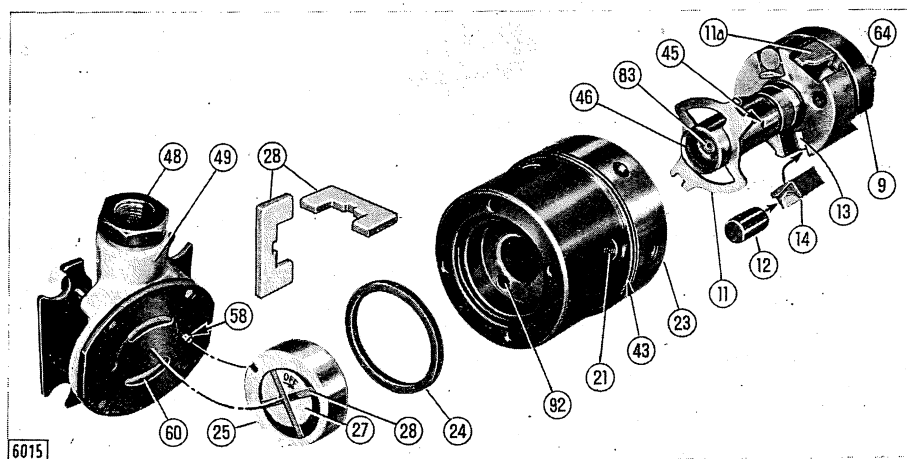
Vane-type pump, hydraulic head (23), rotor (46) and transfer pressure regulating valve (49).
